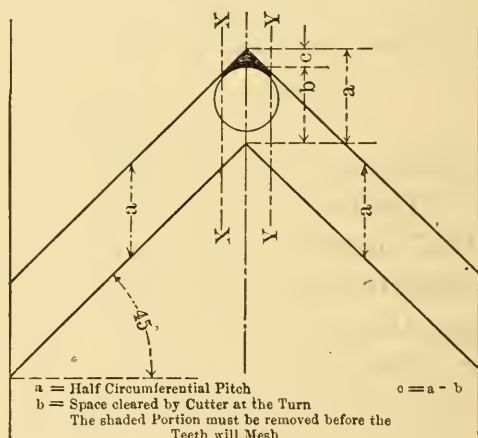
DIAGRAM OF SPACE NOT CUT BY MILLING PROCESS OF CUTTING DOUBLE HELICAL GEARS.
